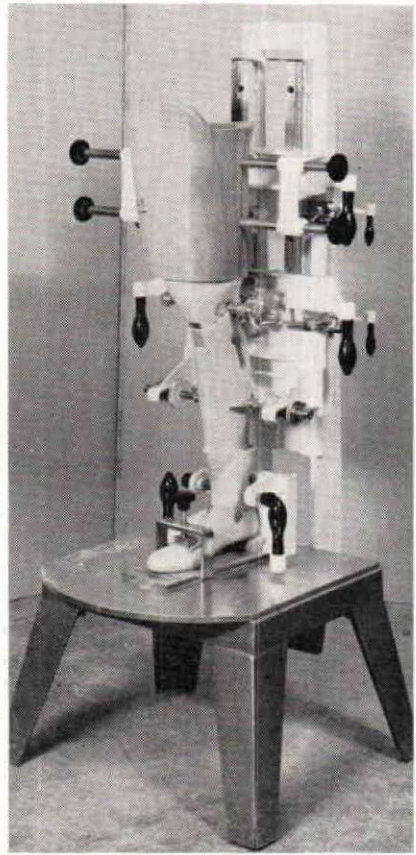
Three Components in Transfer Jig, Ready for Cutting Down.
